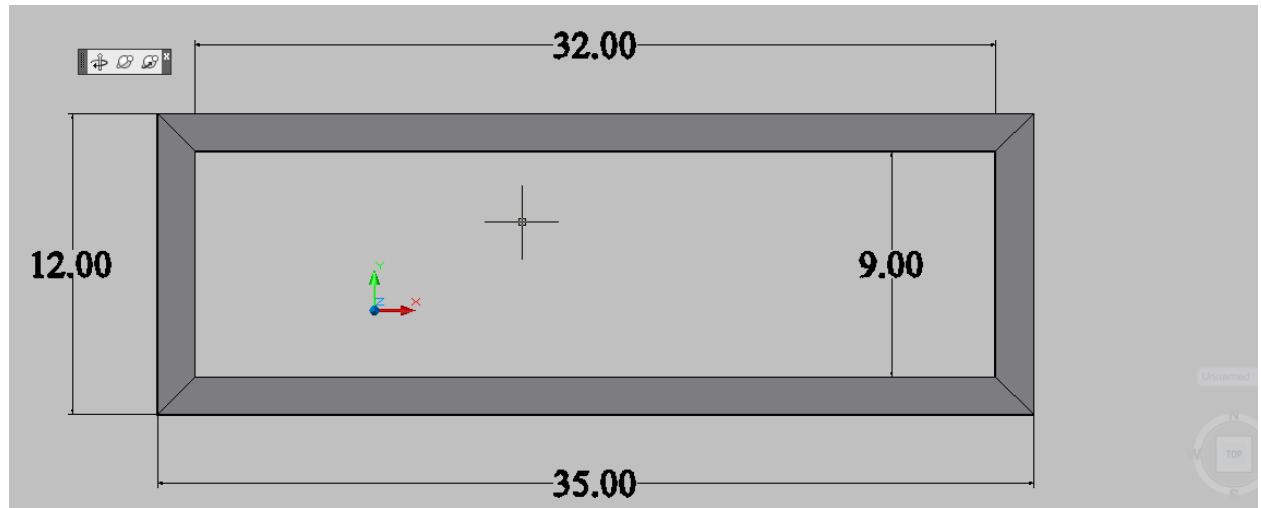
Top View of the Frame (all dimensions are in inches)
